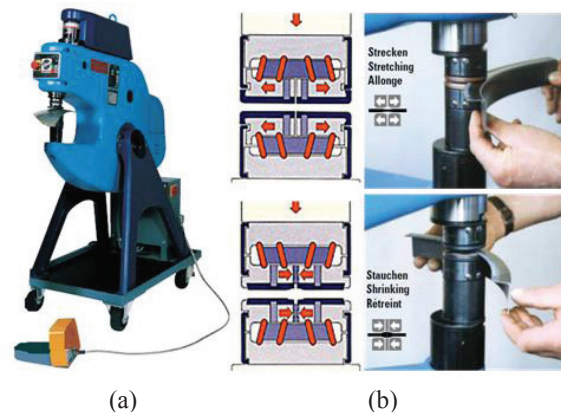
(a) Driving machine; (b) Driving tools for stretching and shrinking [5]
